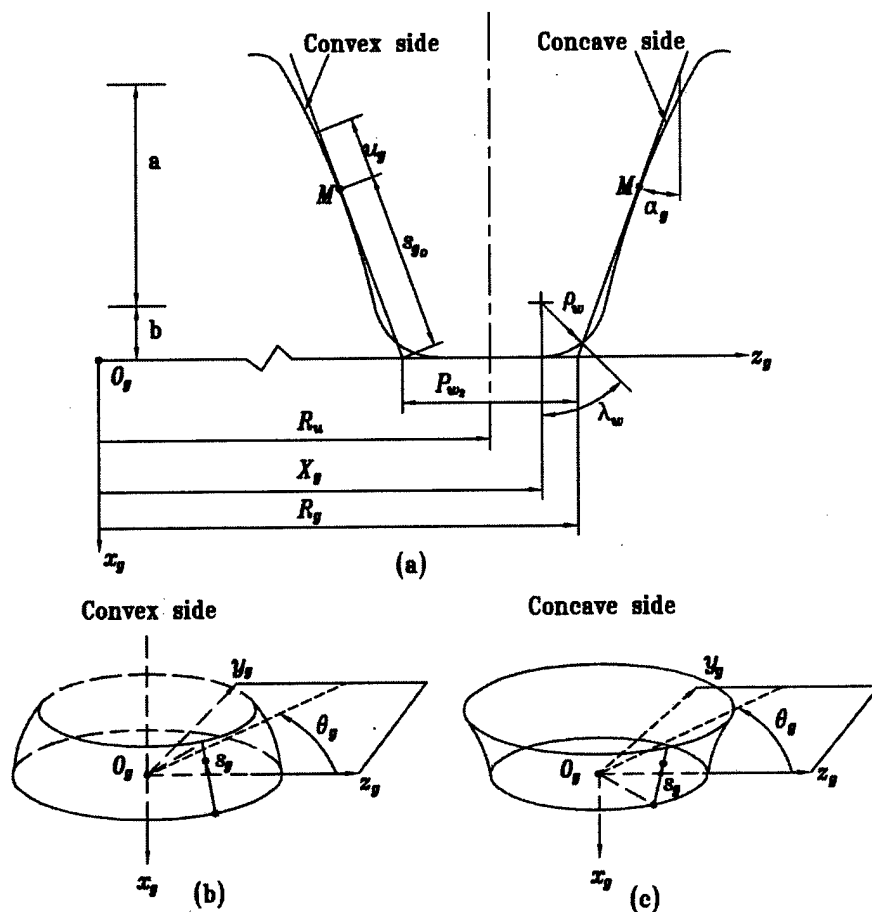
Illustration of gear cutter blades and generating surfaces.
